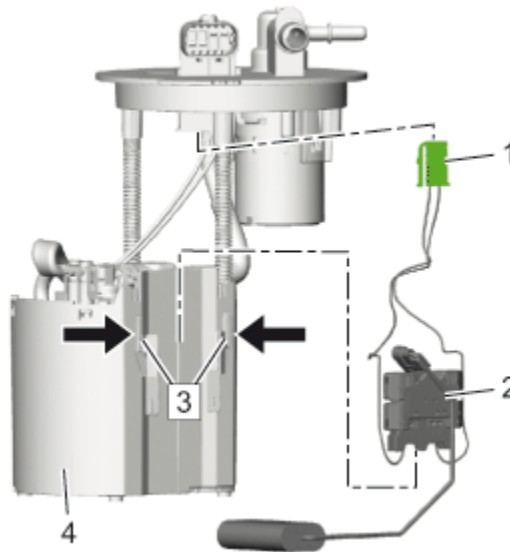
Fuel Level Sensor, Fuel Pump Module, Retaining Brackets And Electrical Connector
